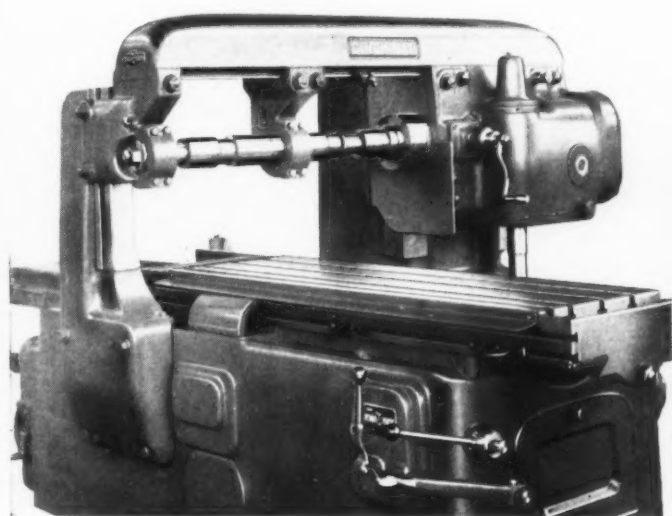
(Upper Left) Machine Used for Milling Crankshafts. Fig. 5. (Upper Right) Machine as Rebuilt for Milling Bottom and Bearing Locks of Cylinder Blocks
